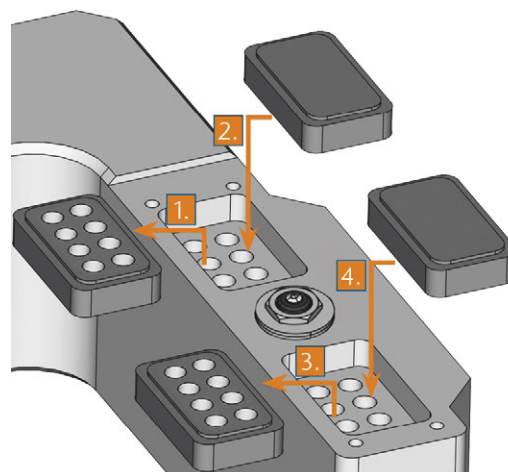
NEW TOOL MAGAZINE INSERTS (RIGHT, WITHOUT TOOL POSITIONS) REPLACE OLD INSERTS (LEFT, WITH TOOL POSITIONS)
